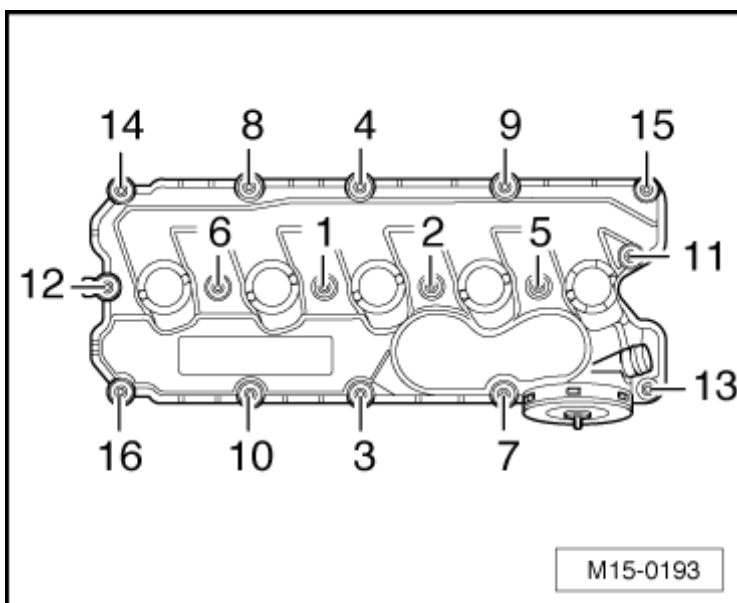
Removing Bolts For Cylinder Head Cover In Sequence
